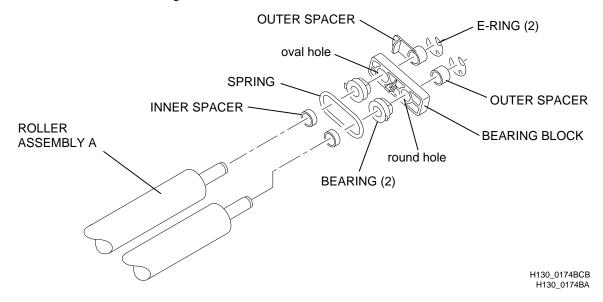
Drive End of the EXIT SQUEEGEE ASSEMBLY
